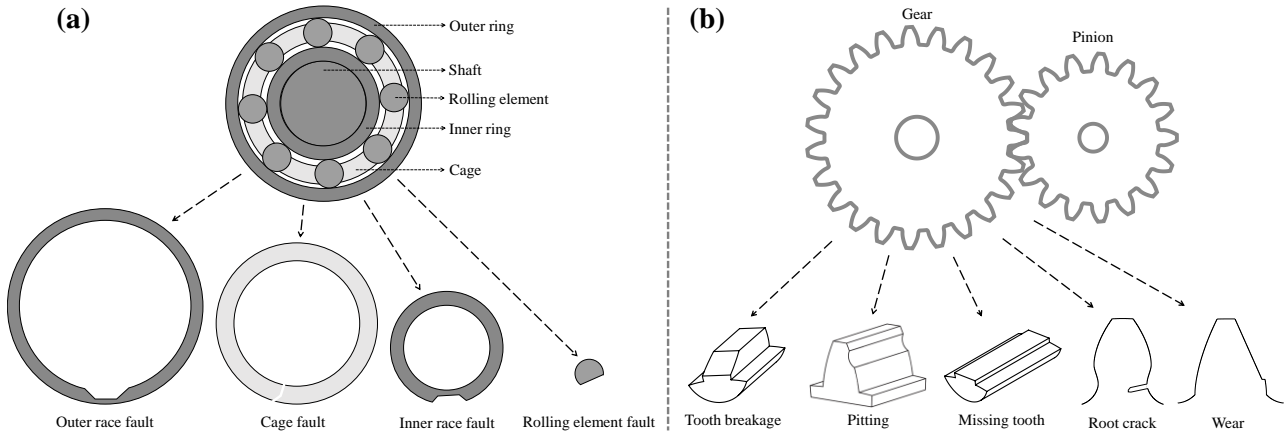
Examples of faults in rotating components: (a) examples of bearing faults, (b) examples of gear faults.
